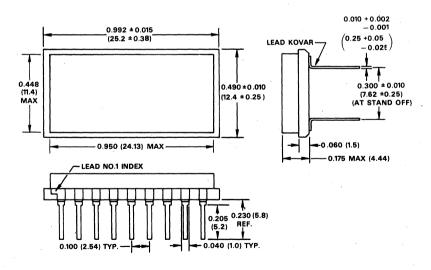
Hermetically-Sealed Ceramic Package Dimensions shown in inches and (mm).
